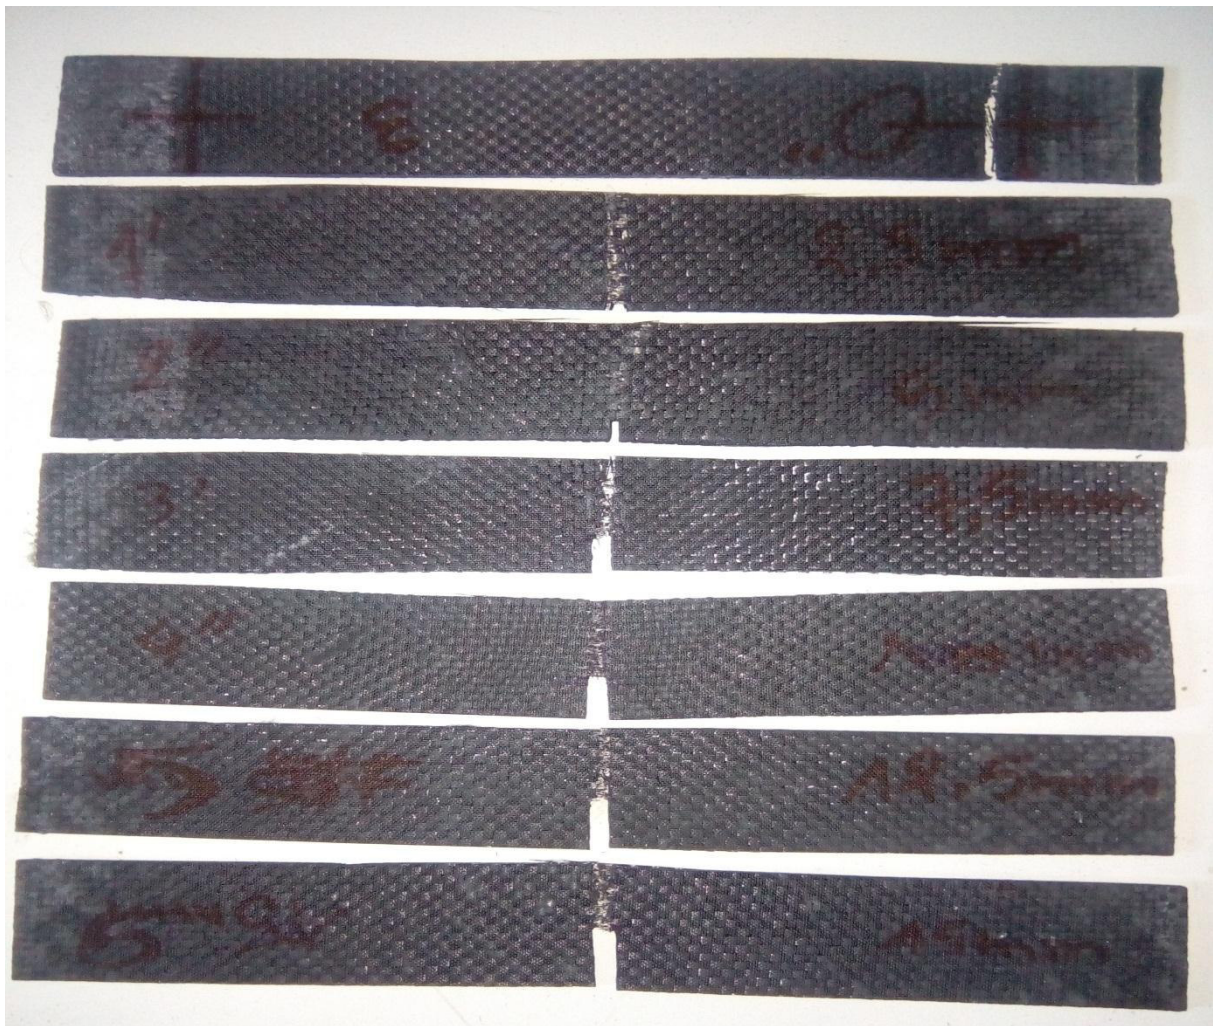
different carbon/epoxy crack sizes specimens after tensile test
